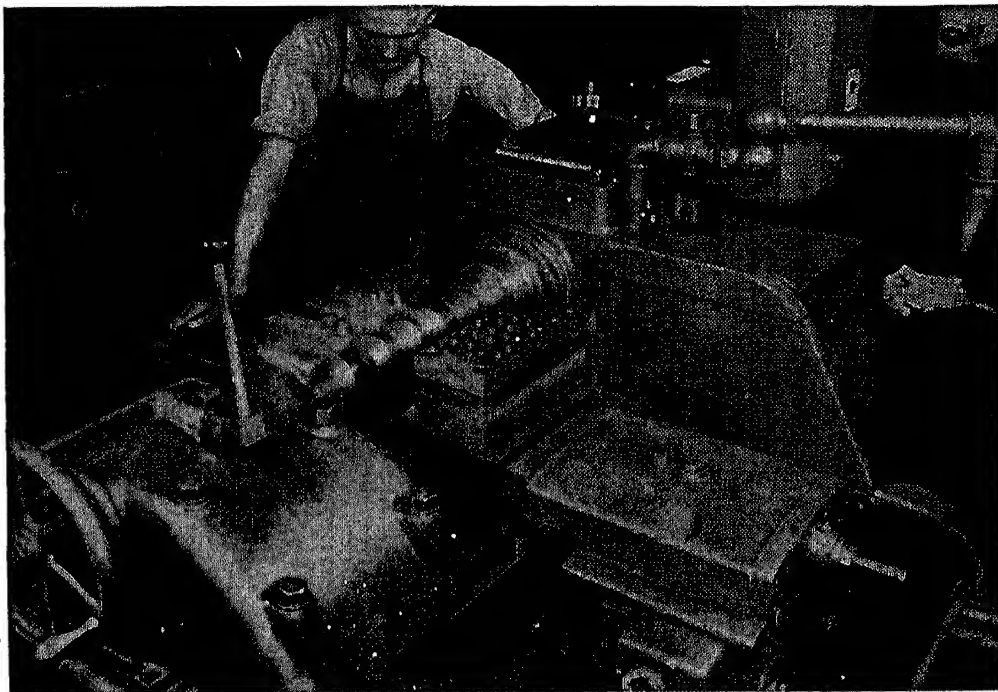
An automatic lathe. (Courtesy Sundstrand Machine Tool Co.)
